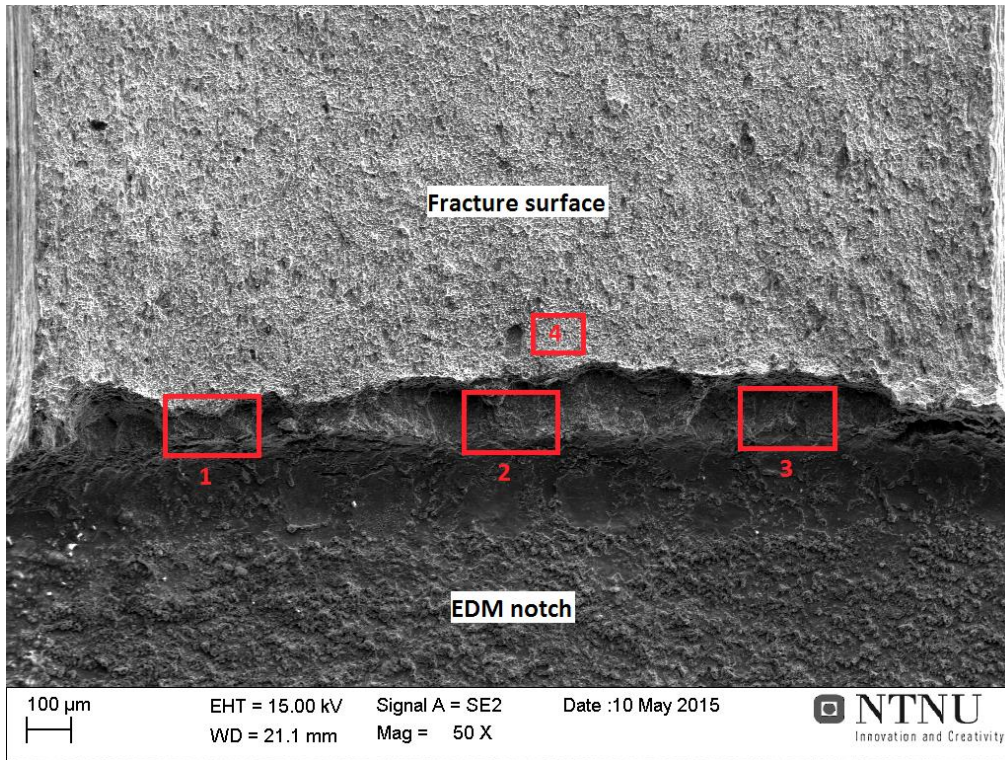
Sample A, test 5, fracture surface on BM section of specimen.
